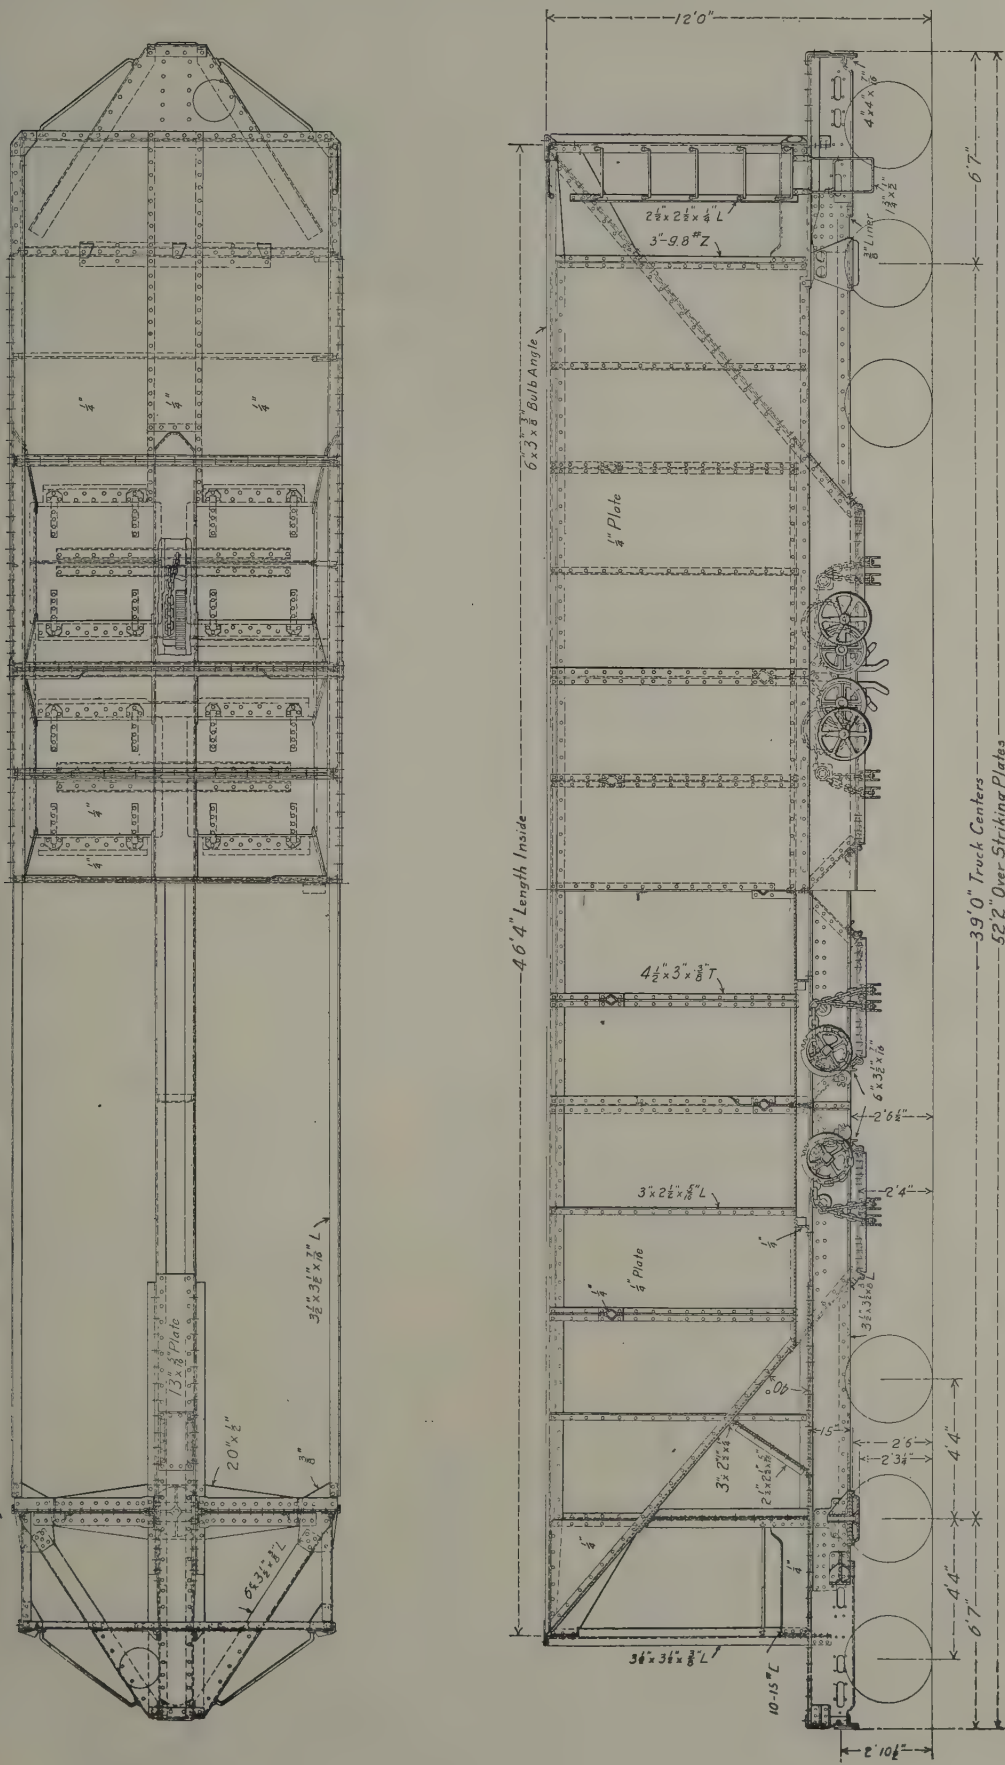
Plan and Elevation, 100-Ton Hopper Car. Shown in Figs. 51-52.
